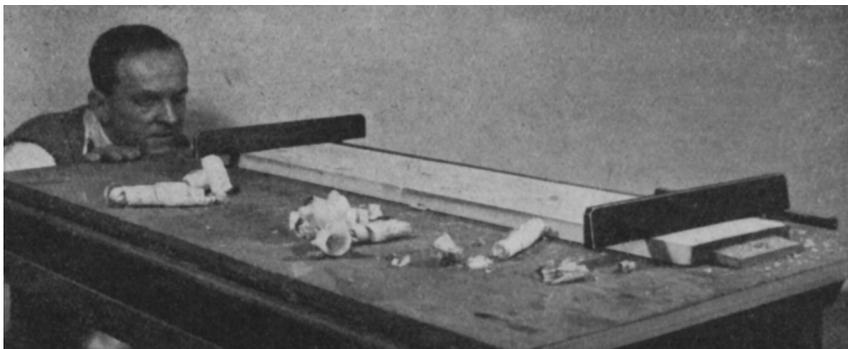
SIGHTING THE PARALLEL STRIPS WHEN TESTING FOR WINDING
